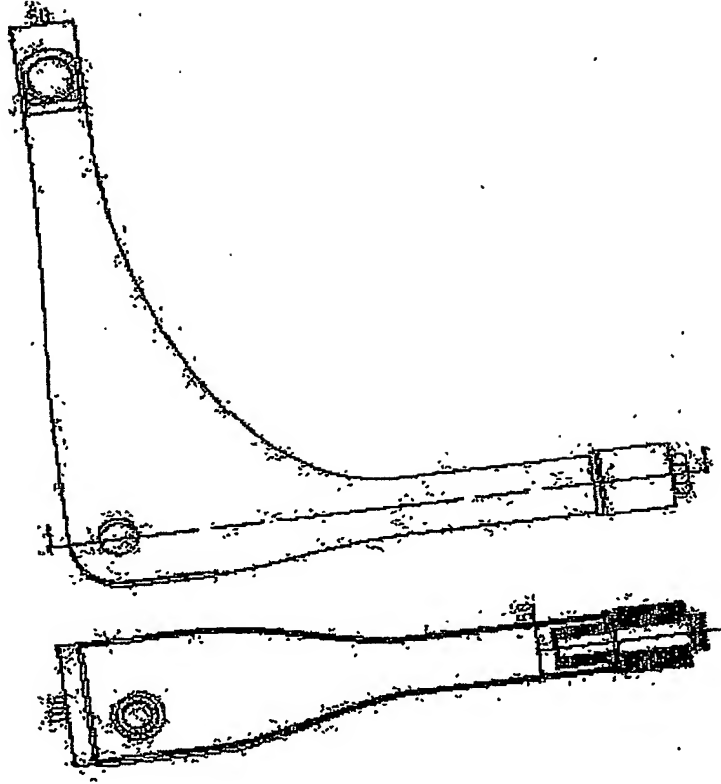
Detailed engineering drawing of the carbon reinforced composite lower suspension arm (or A-arm)
